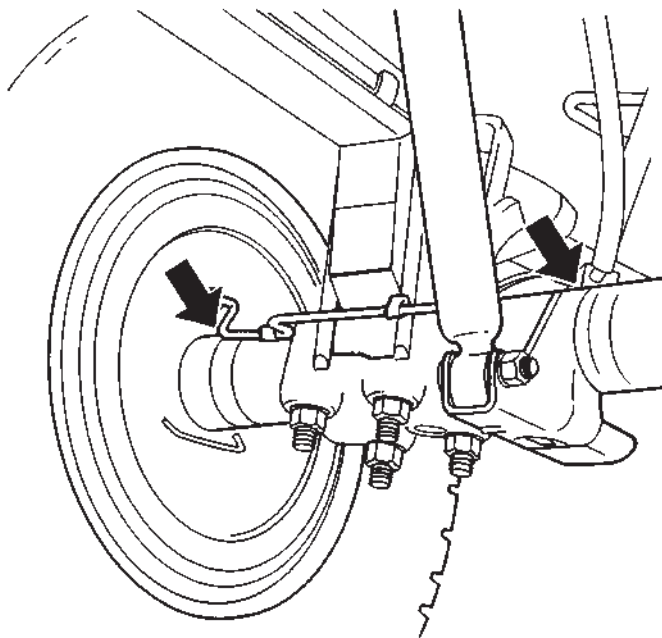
PARKING BRAKE CABLE AND BRAKE LINE
